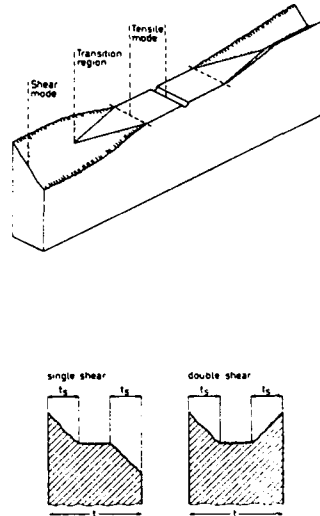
Tensile mode and shear mode fracture surface.
